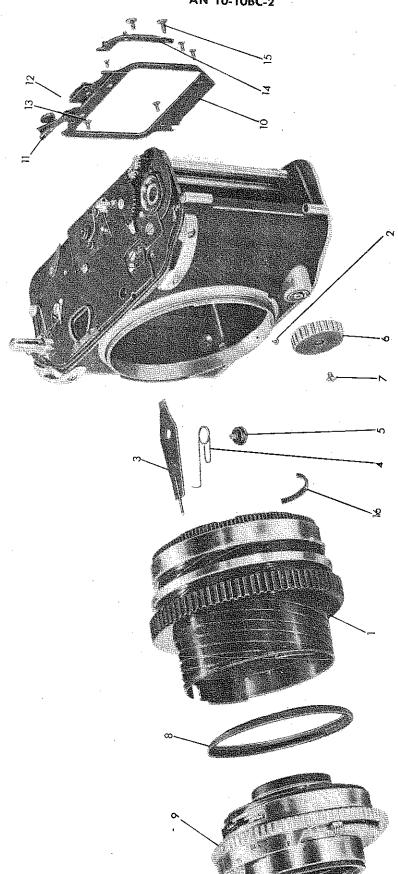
Shutter and Focusing Tube Assembly, Exploded from Camera Case
